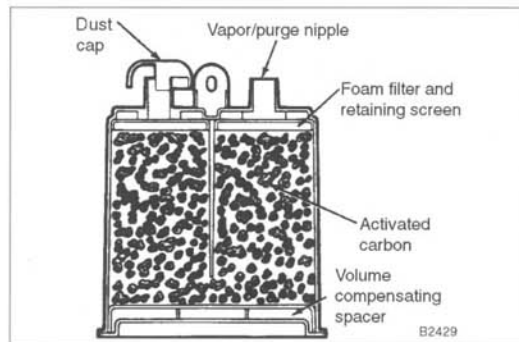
Carbon canister stores fuel vapors from tank and engine. Canister is purged by drawing fuel vapor into engine, under control of the control module.
